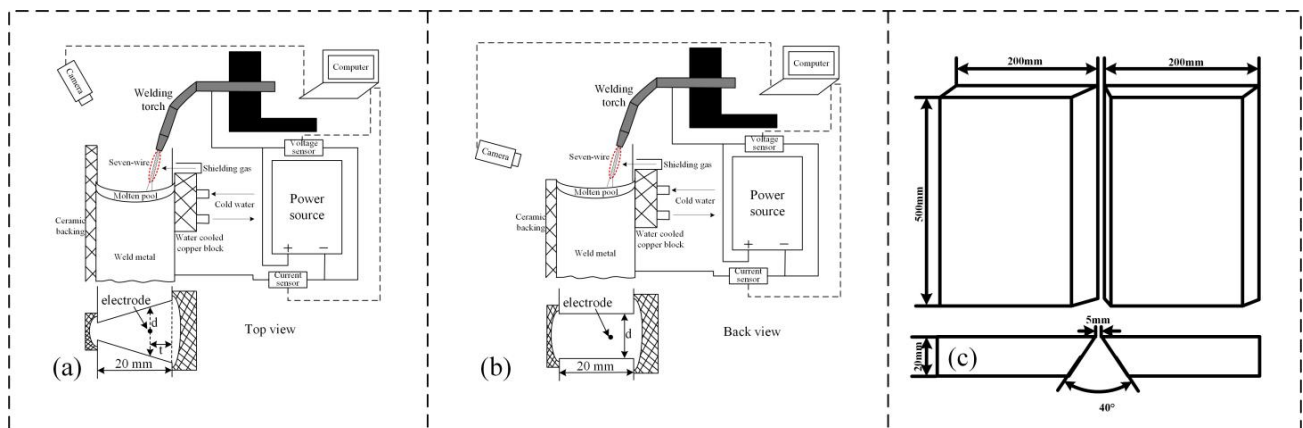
Schematic diagram of welding equipment and butt-joint test plate [7]: (a) Top view, (b) Back view, (c) diagram of the butt-joint test plate
